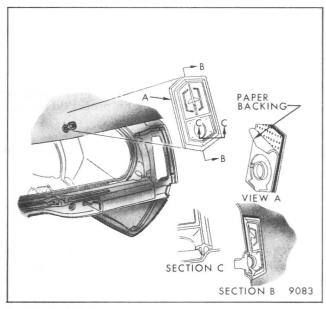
Oldsmobile Adhesive Backed Lock Cylinder Emblem
